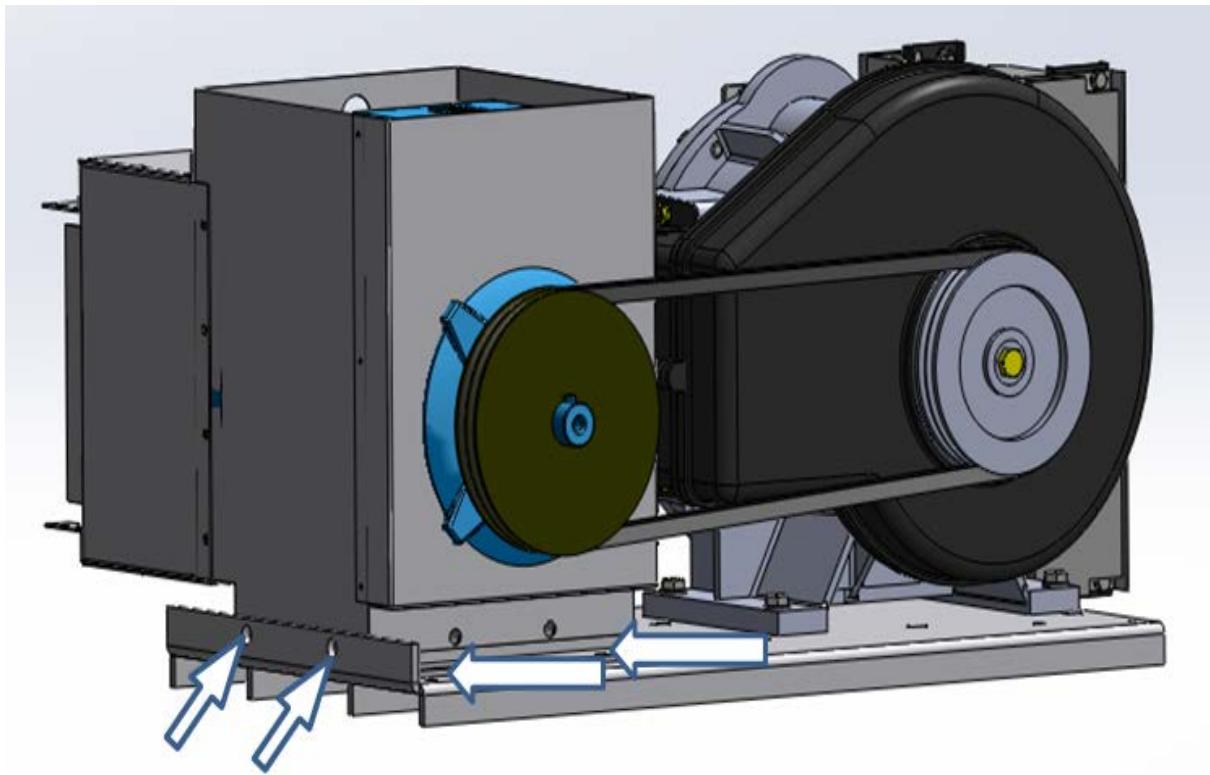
Motor, Transmission and compressor. Arrows indicating belt tensioning bolts (left) M8 motor bolts (right)
